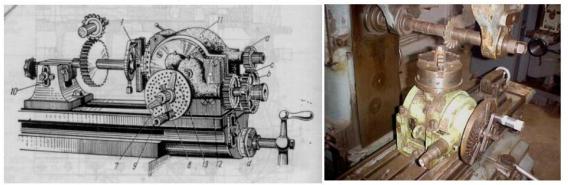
Mounting of job on the dividing head in milling machine.
